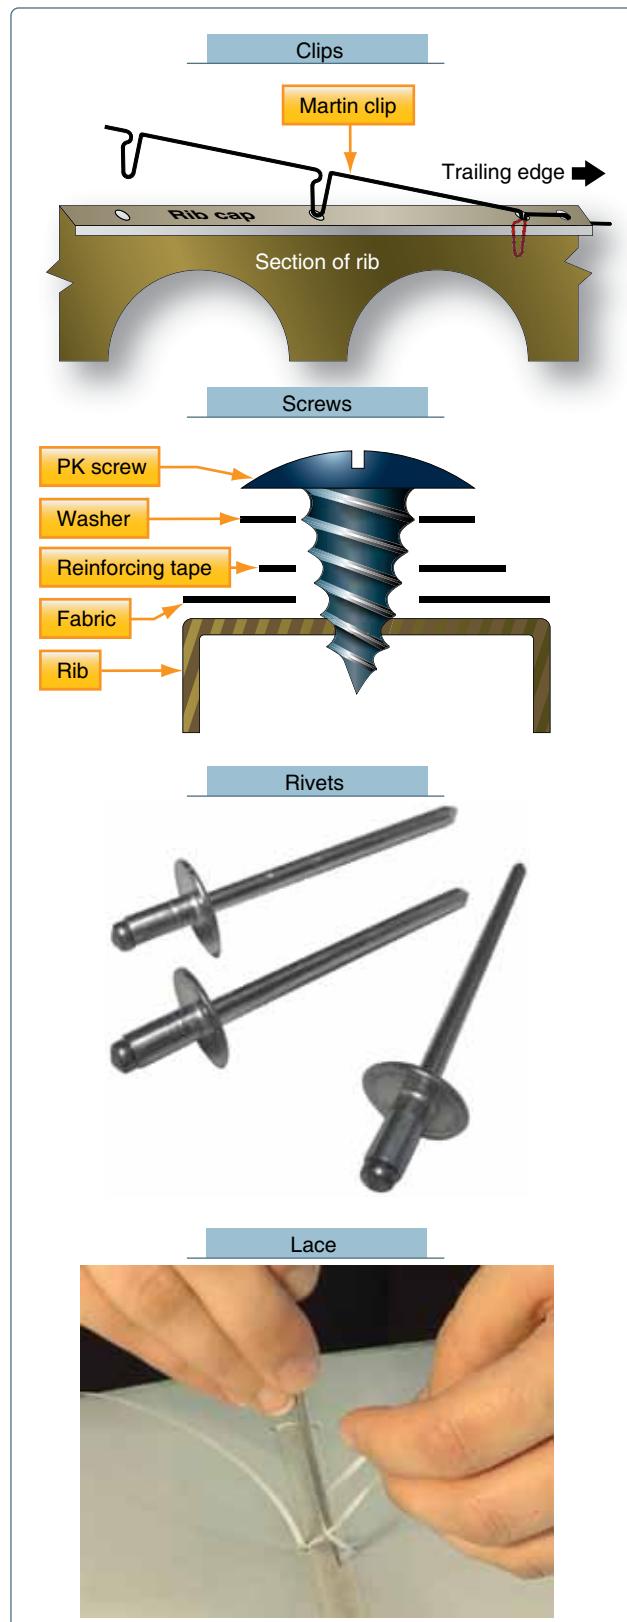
Clips, screws, rivets, or lace are used to attach the fabric to wing and empennage ribs.
